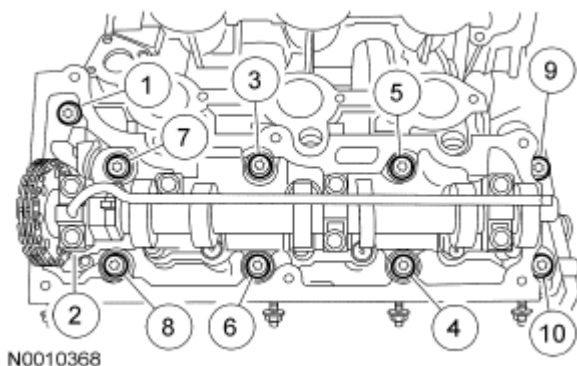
Identifying Cylinder Head Bolts Removing Sequence
